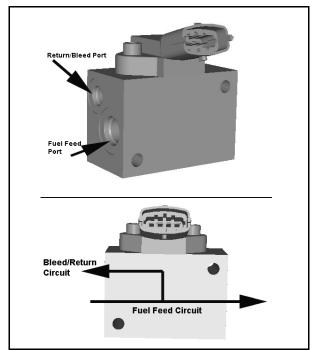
Gasoline Fuel Pressure and Temperature Manifold Assembly
